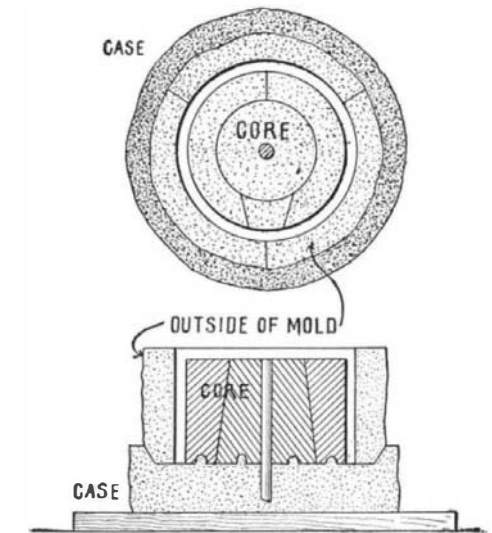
PLASTER MOLD READY TO RECEIVE CEMENT MIXTURE.
